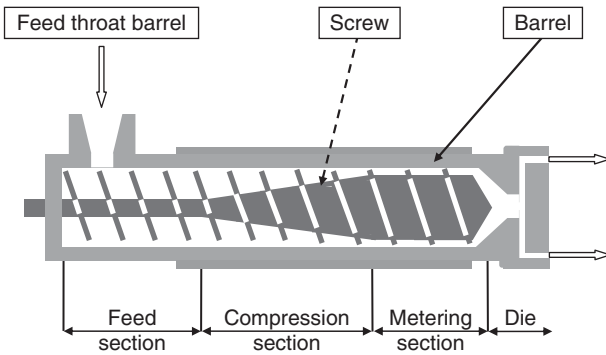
Schematic view of a one-stage 'monobloc' screw-barrel assembly with operating sections.
